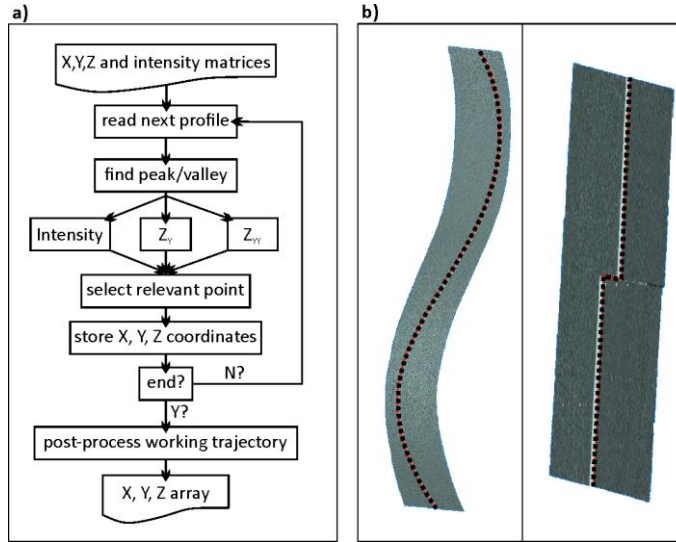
Algorithm for 3D welding trajectory detection (a) and examples of 3D measurements of workpieces with detected welding trajectory (b).
